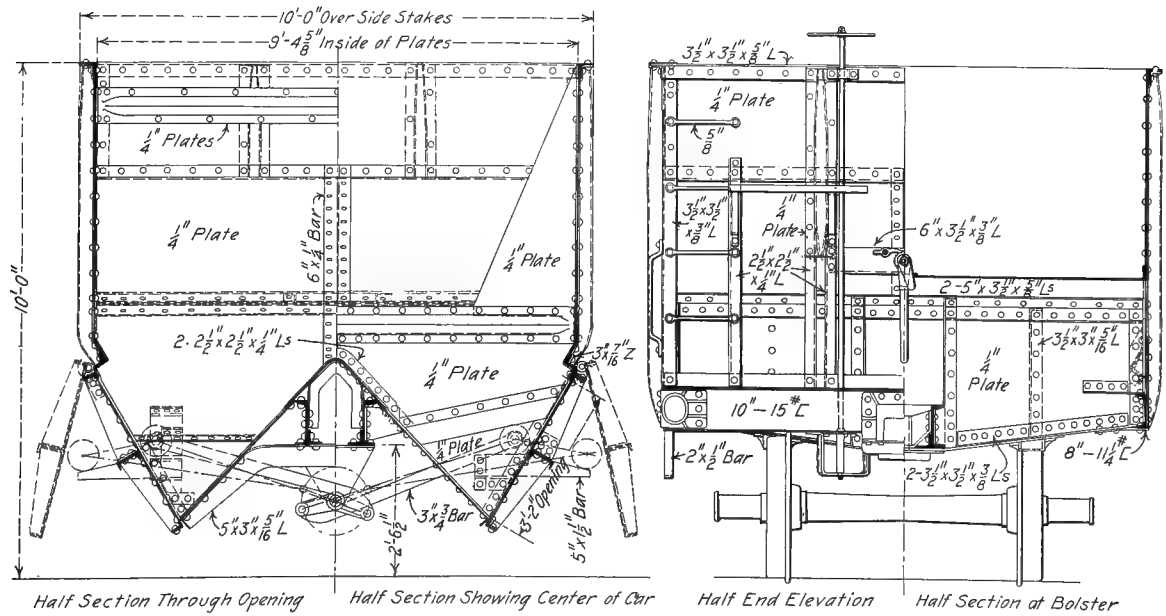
Cross Sections and End Elevation of All-Steel Side Dump Coke Car Shown in Fig. 305.
